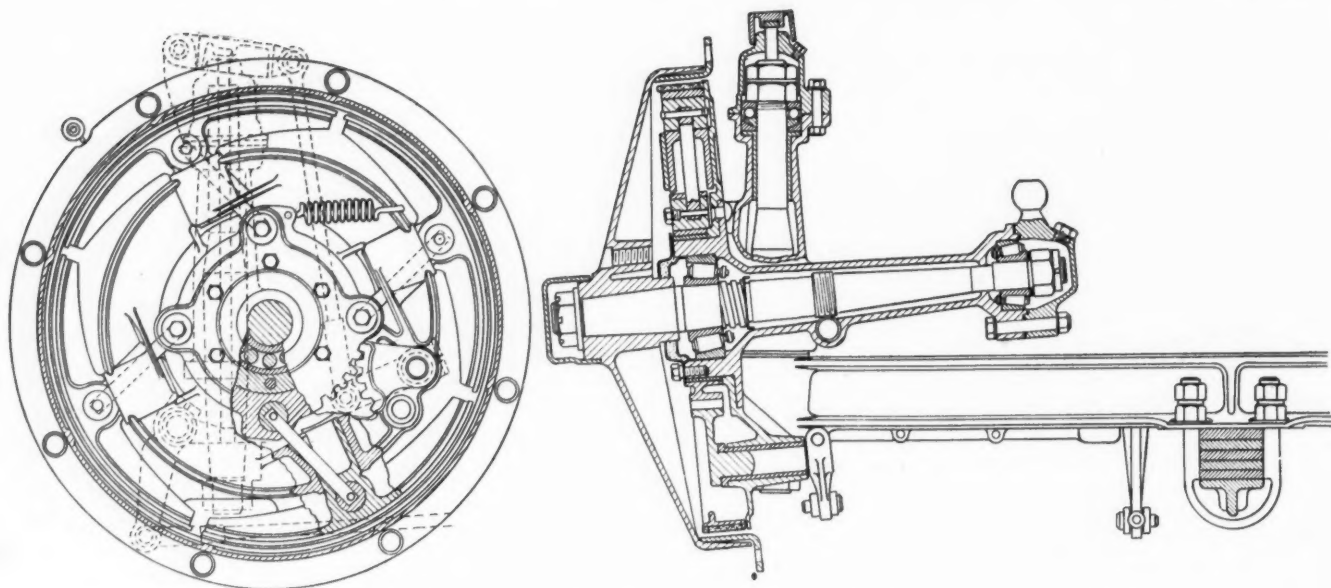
Lavoie, a Canadian design of expanding front wheel brake giving large arc of contact between shoes and drum
